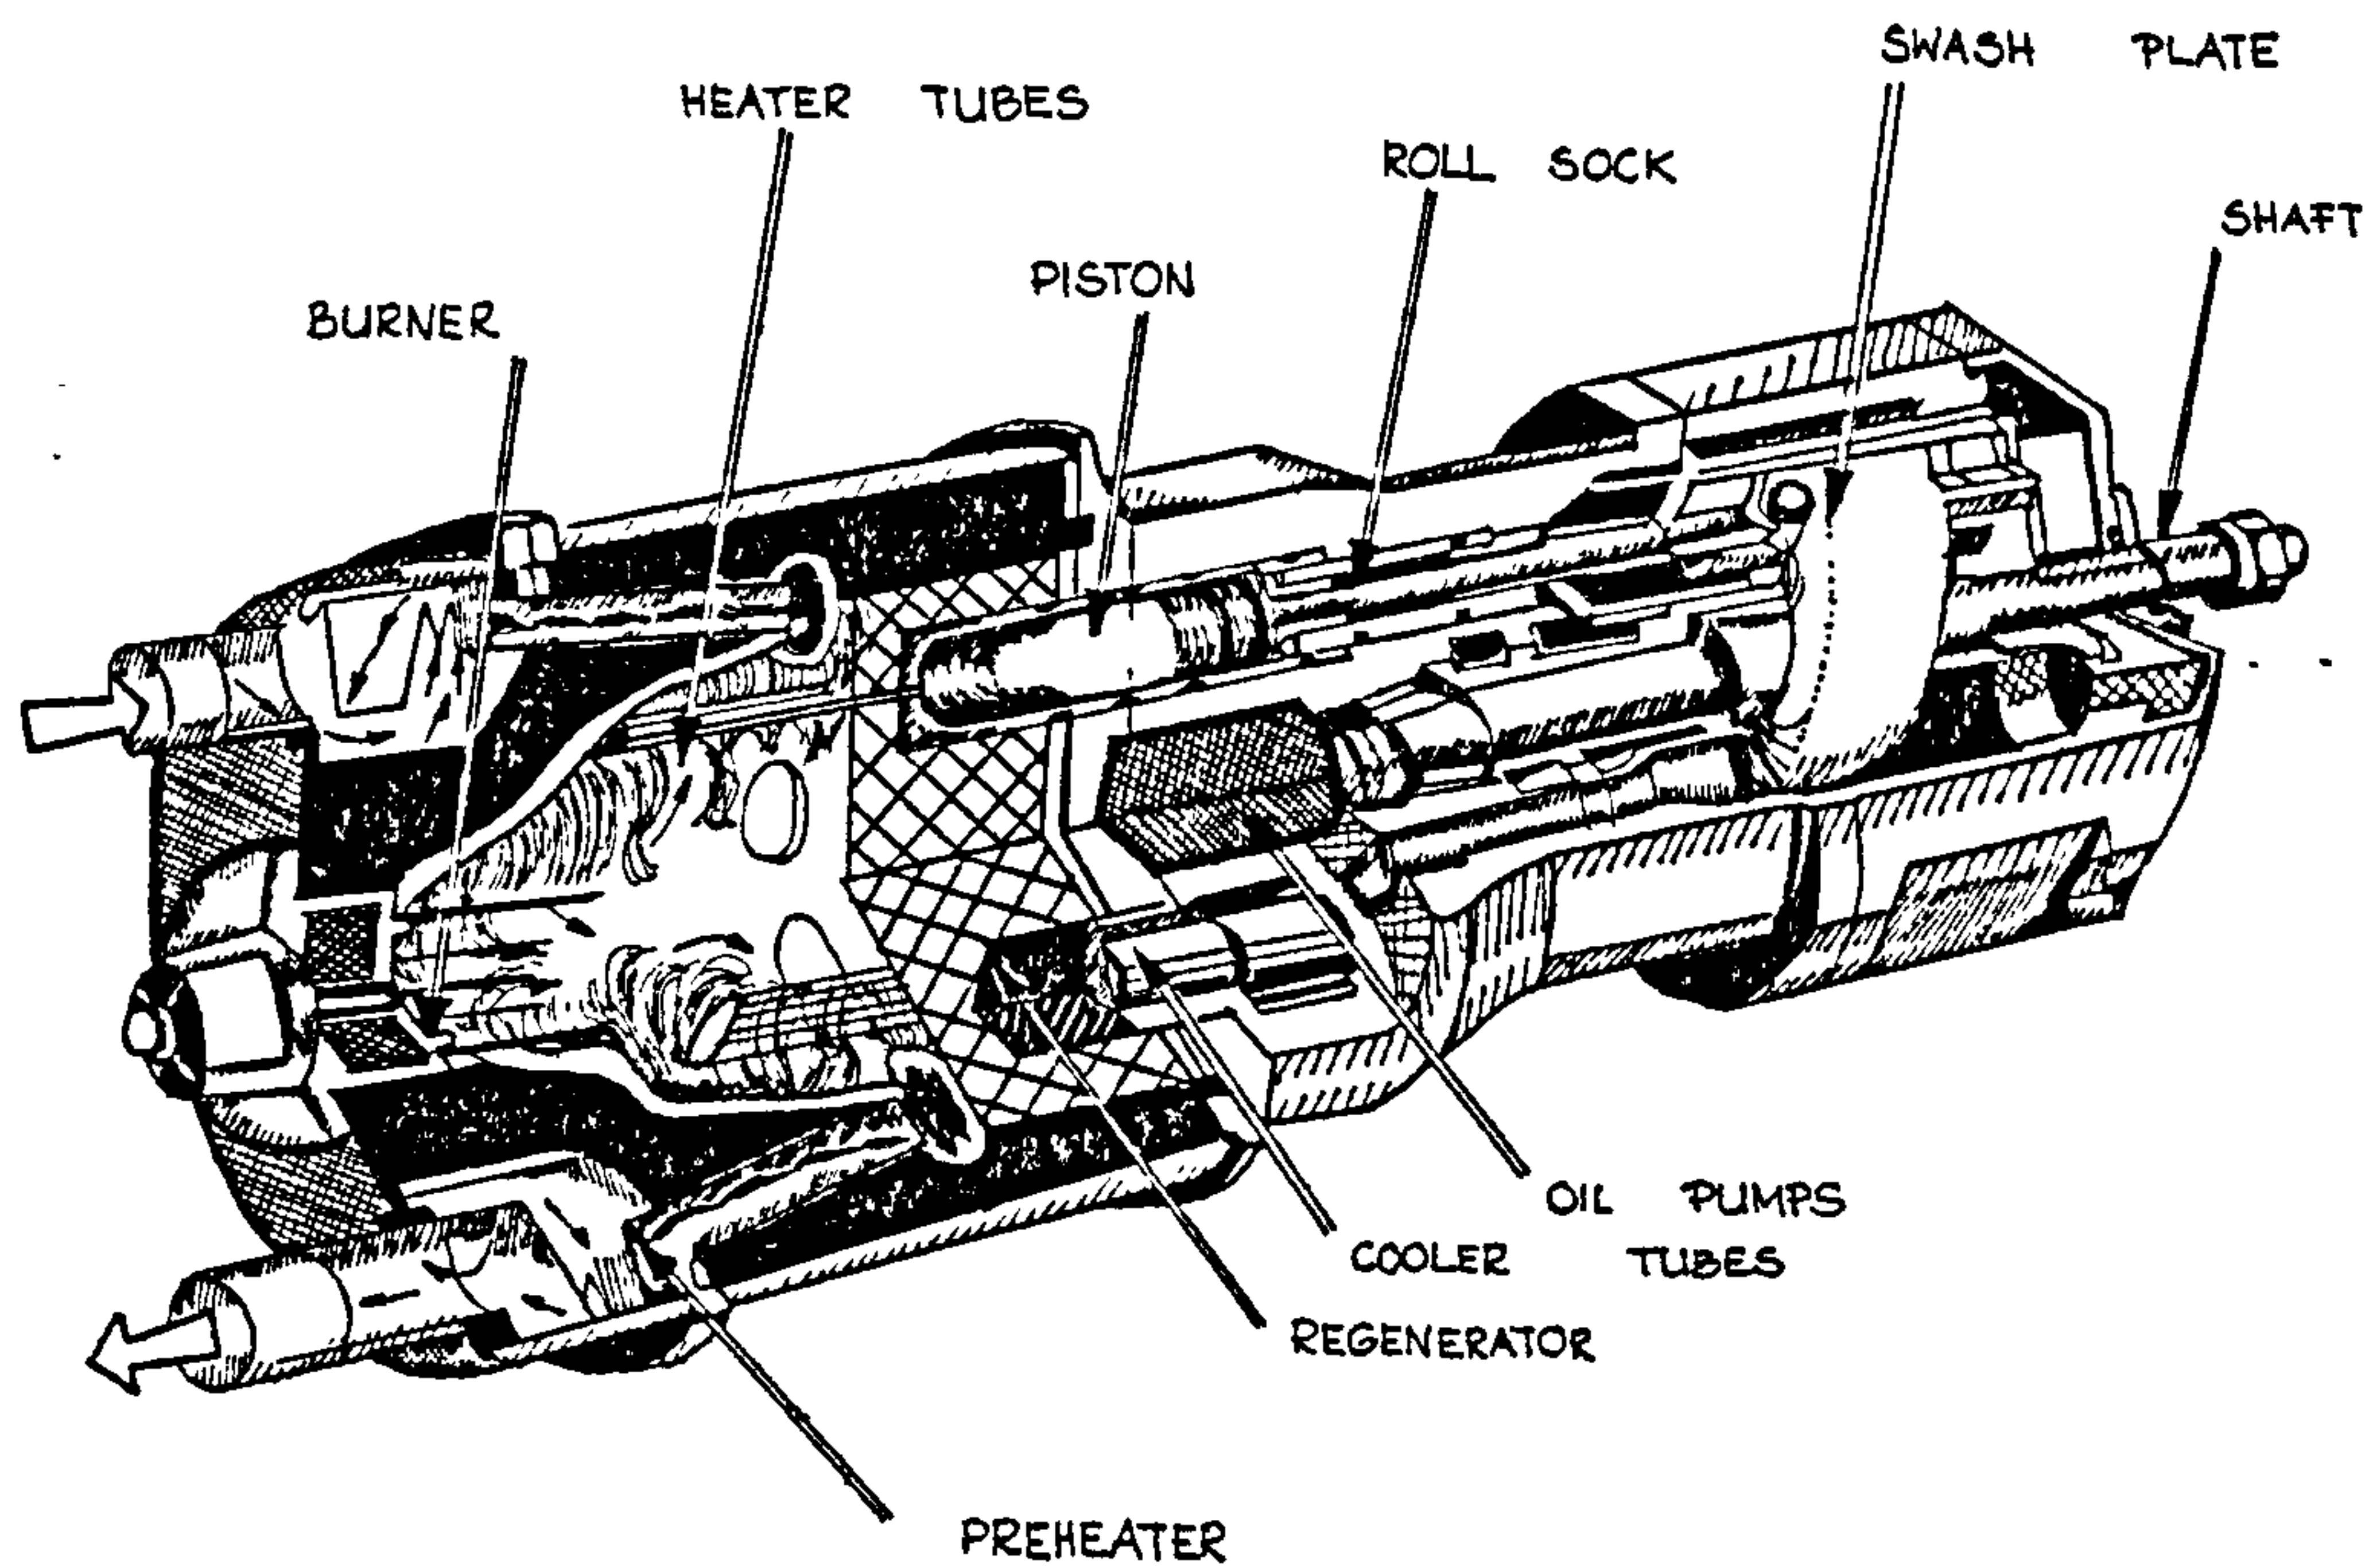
Cutaway drawing of the four cylinder, double-acting swashplate drive Philips Stirling engine.
